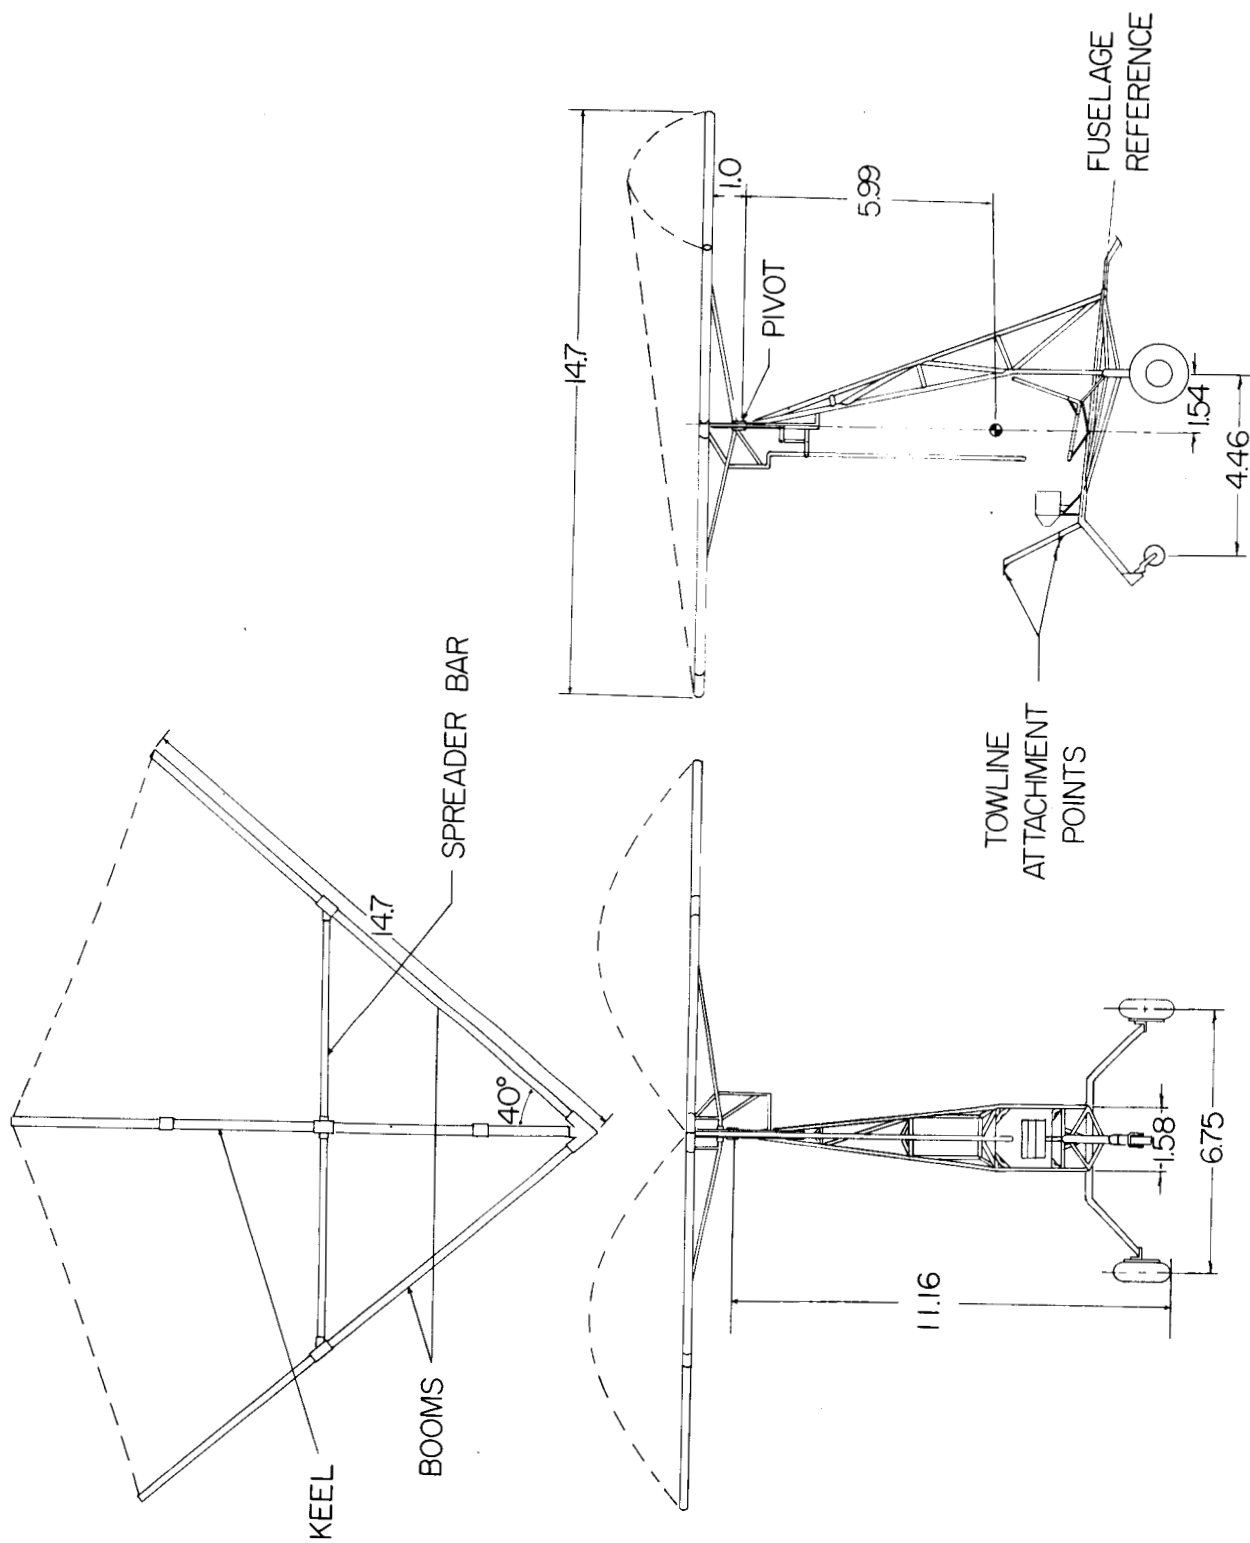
Three-view drawing of vehicle A. All dimensions in feet unless otherwise noted.
